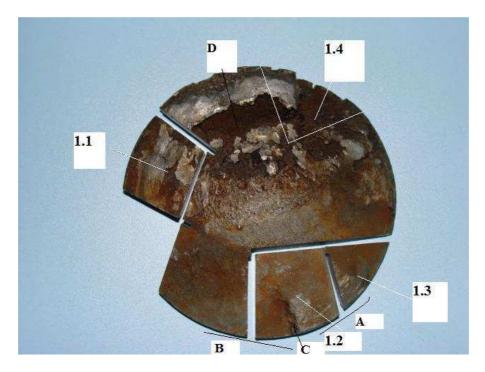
Aspect of fracture surface of axle shaft
